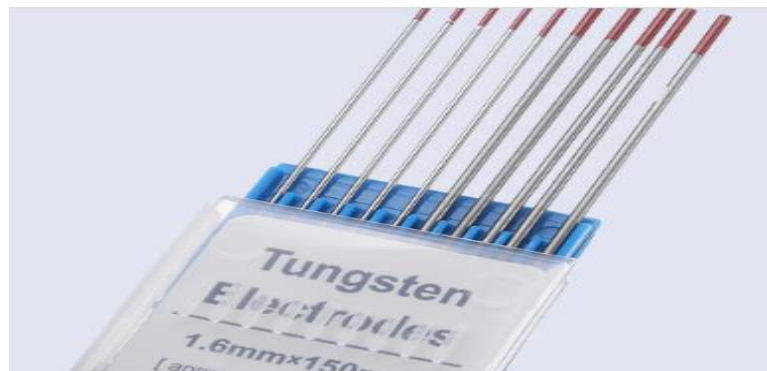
Tungsten TIG Welding Electrodes
